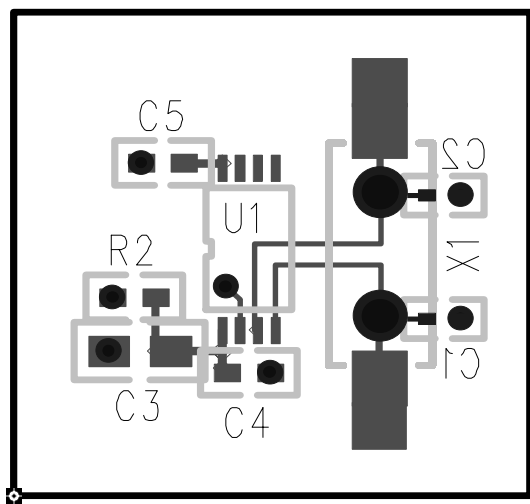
B. ICS843001 PC BOARD LAYOUT EXAMPLE
